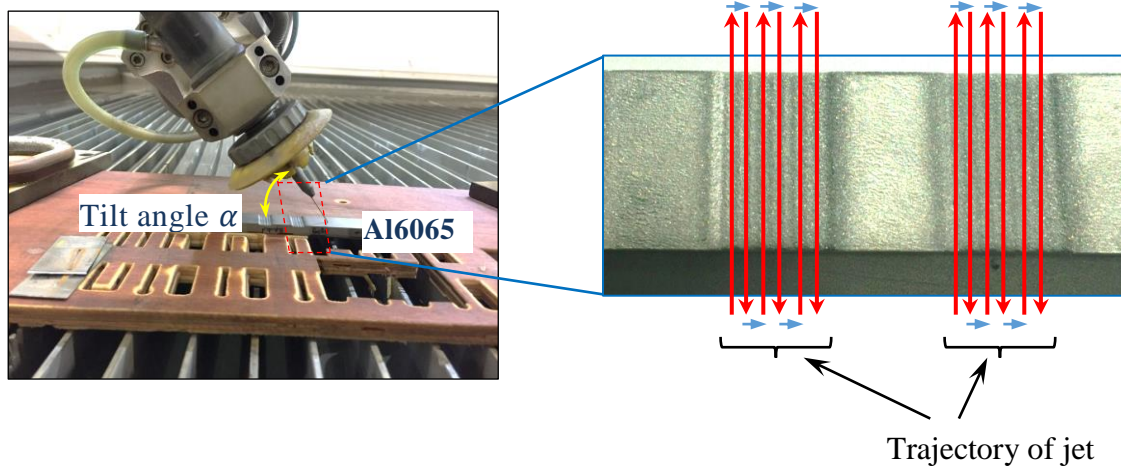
Experimental setup employed for AWJ machining of Al6065.
